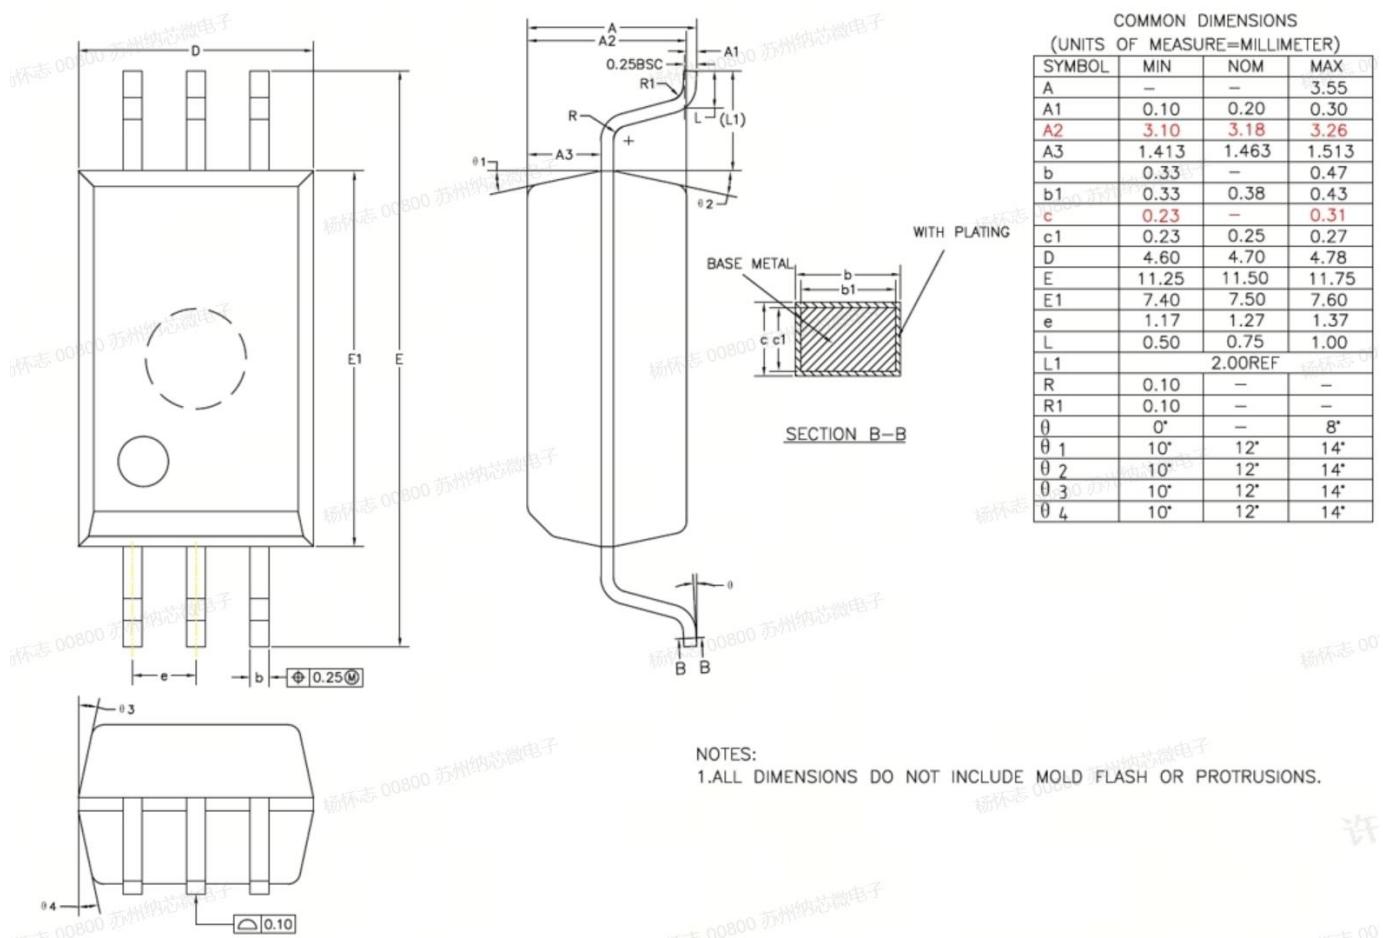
SOW6 Package Shape and Dimension in millimeters
